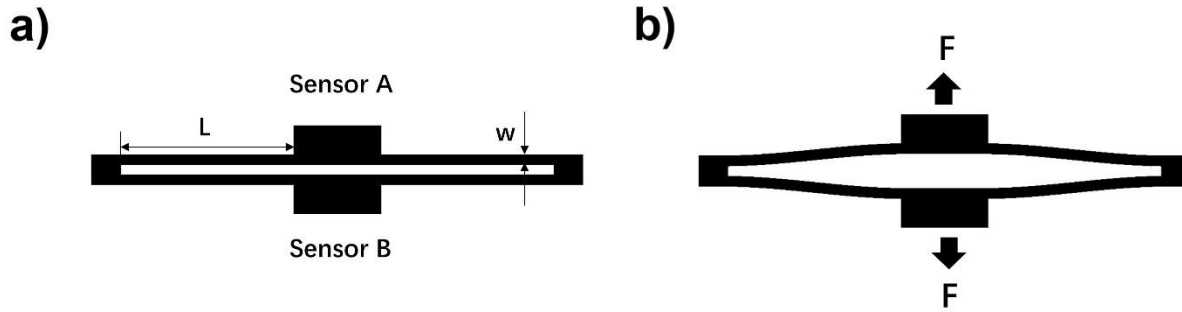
(a) Dimensions in a o-shaped load cell. (b) Deformed load cell under tension.
